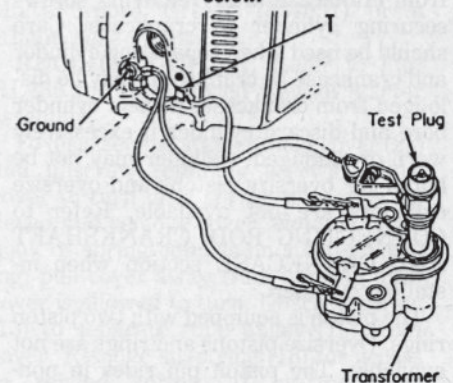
A test plug may be used to determine if ignition system is operating correctly. See text.
